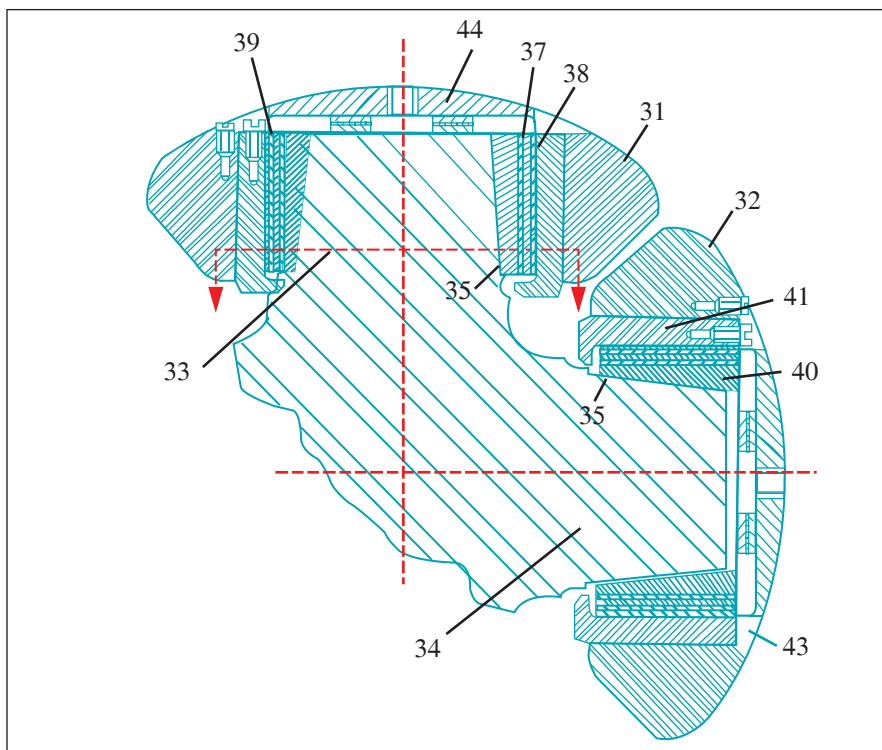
A large u-joint with thin-layered, rubber-metal bearings.
